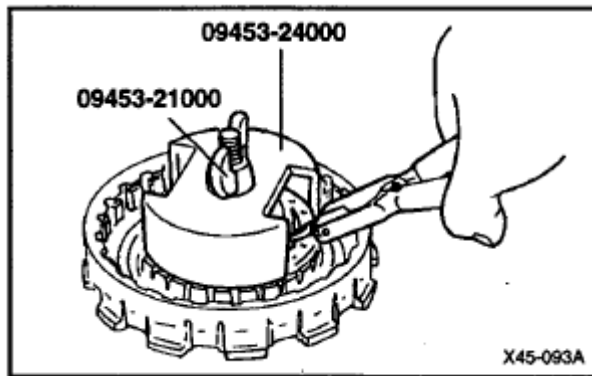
Compressing Return Spring With Special Tool & Installing Snap Ring
